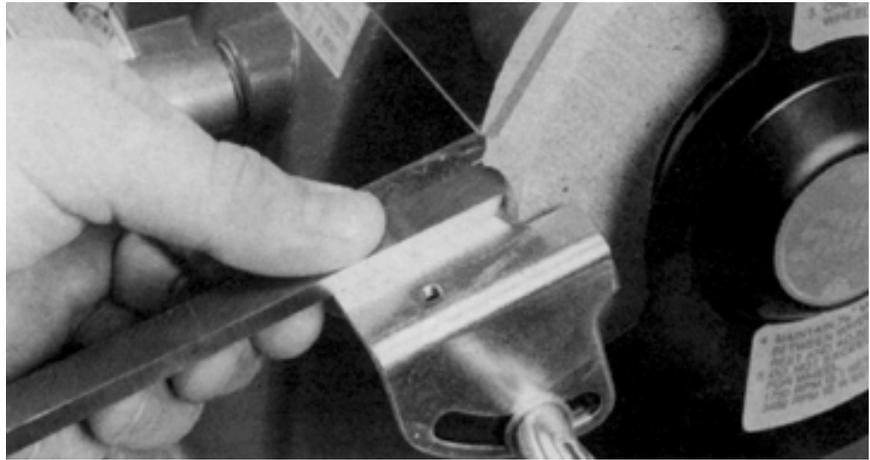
Slide the chisel, bevel down, until its center touches the grinding wheel.
